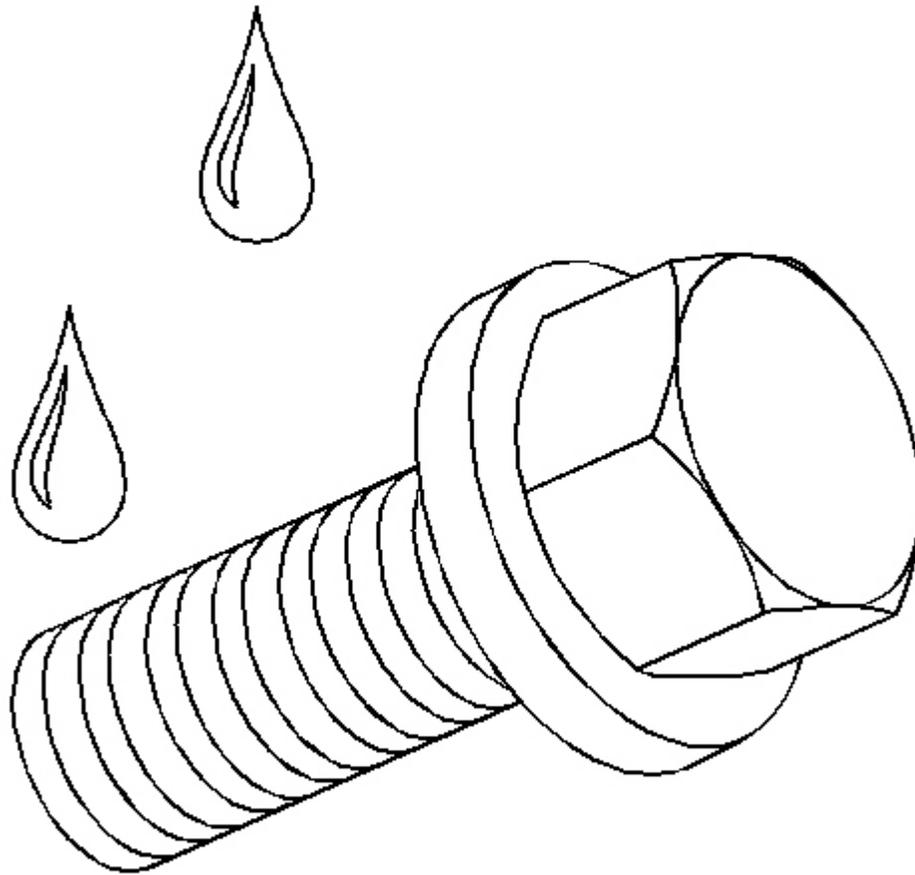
Applying Sealant To Top Extension Housing Bolt
